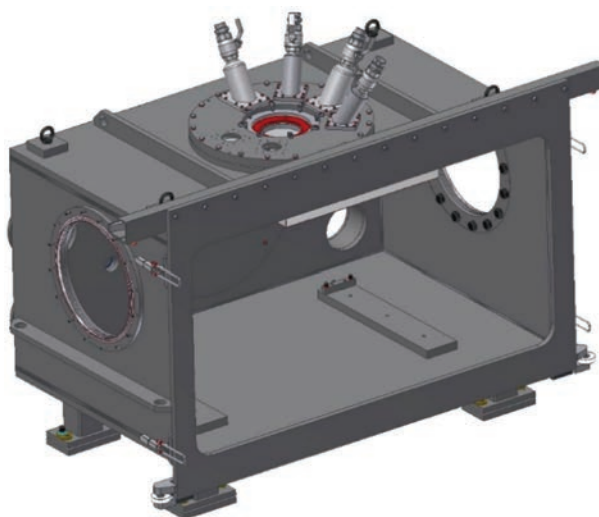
An example of design of welding chamber module for high-productive welding machine
